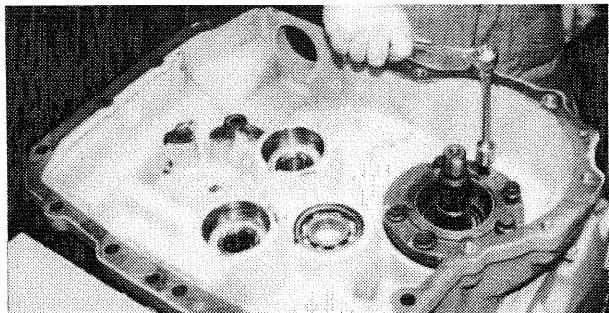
Disassembly of the Gear Train (1 of 2)
